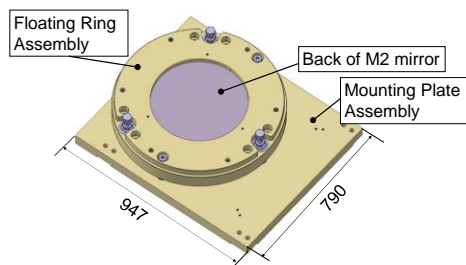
Floating Ring and 'Upper Mounting Plate sub-assembly' of the M2 structure. Overall dimensions are in millimetres.
